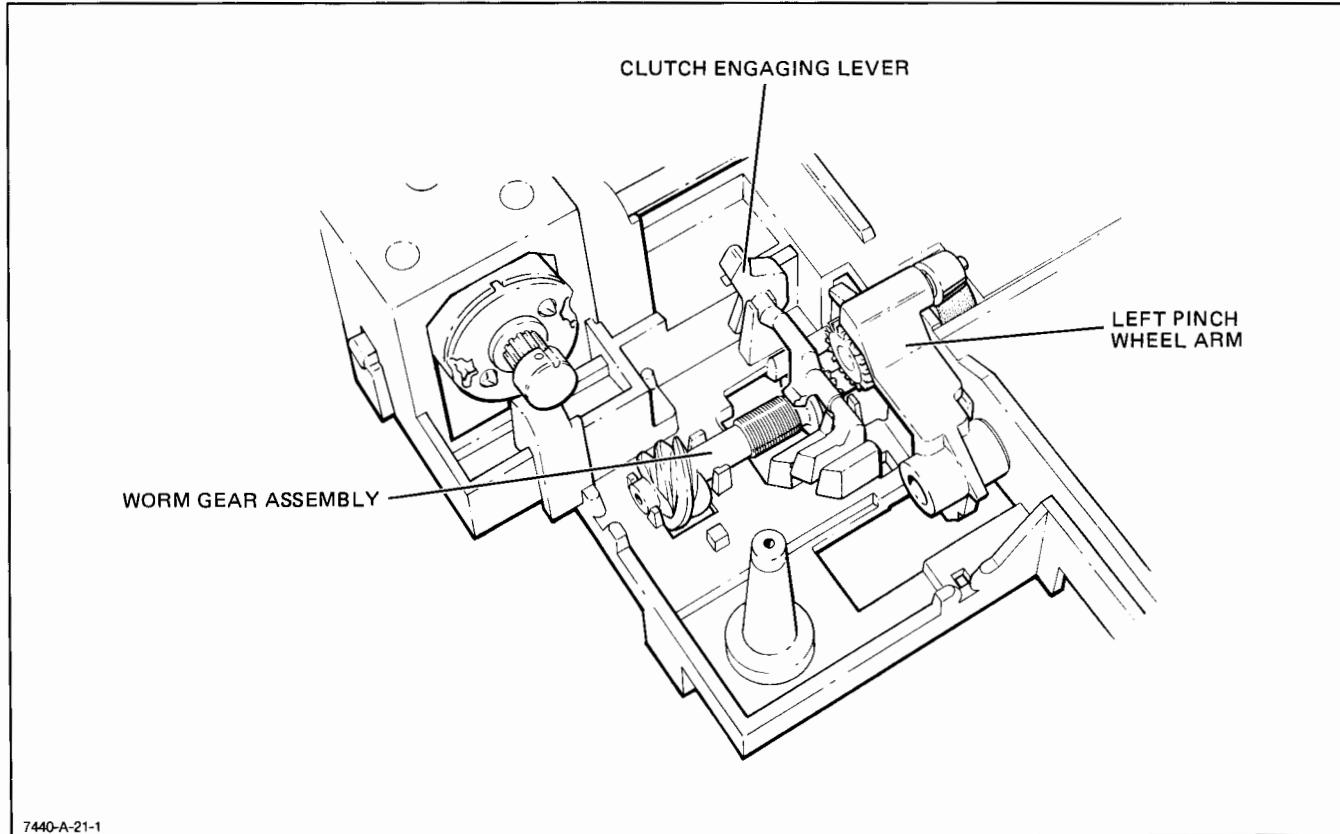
Left Pinch Wheel Arm Removal, Detail E
